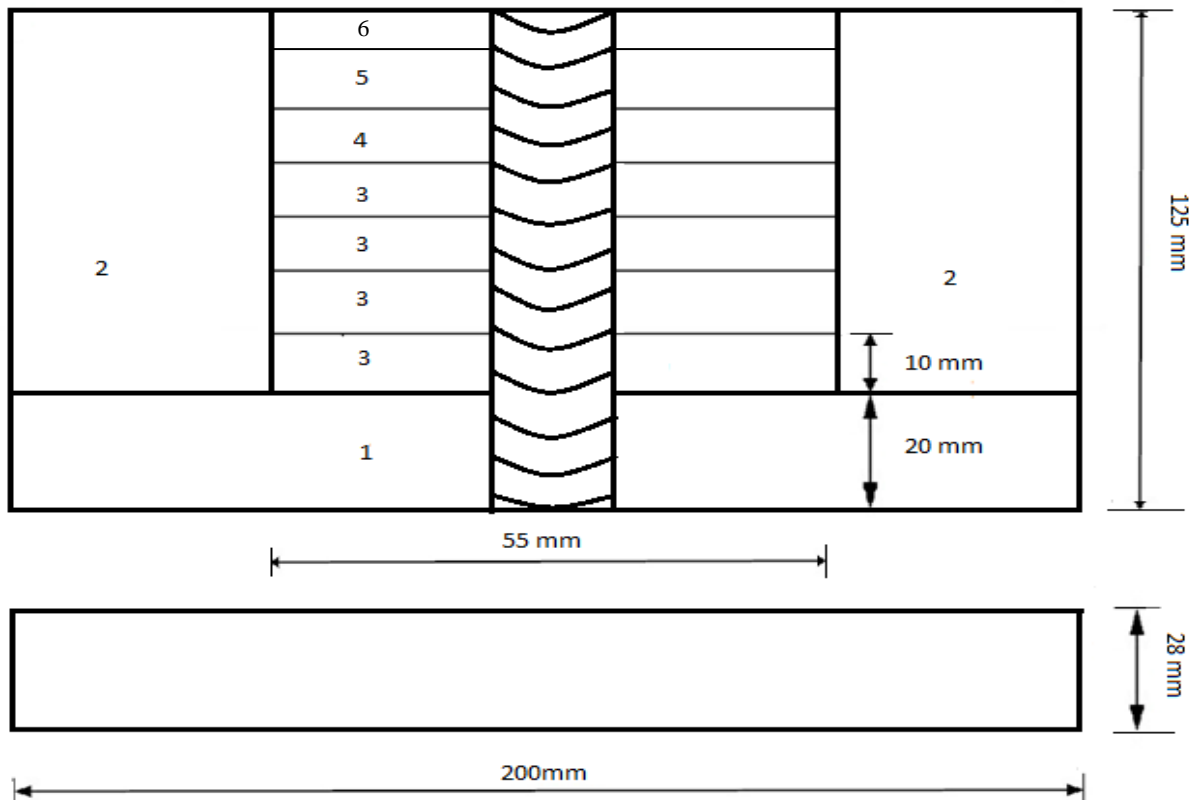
Orientation of Cutting of plates after welding
